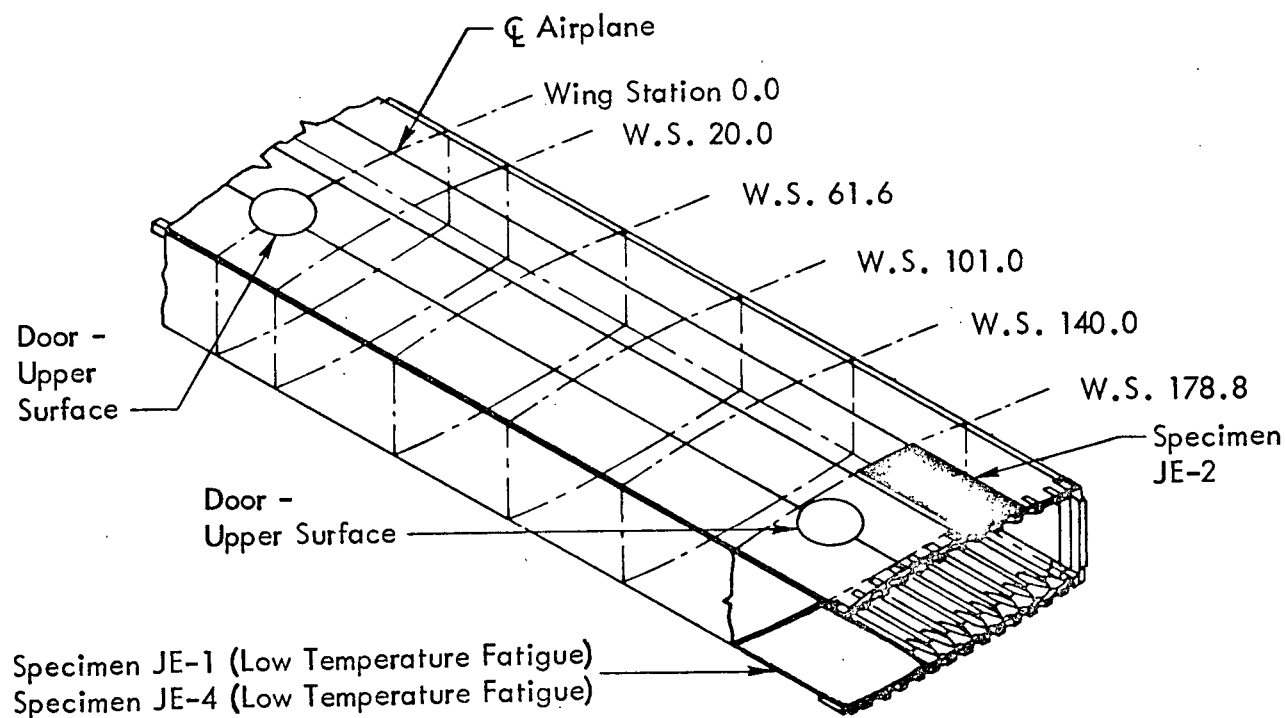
LOCATIONS OF JOINT EVALUATION SPECIMENS
